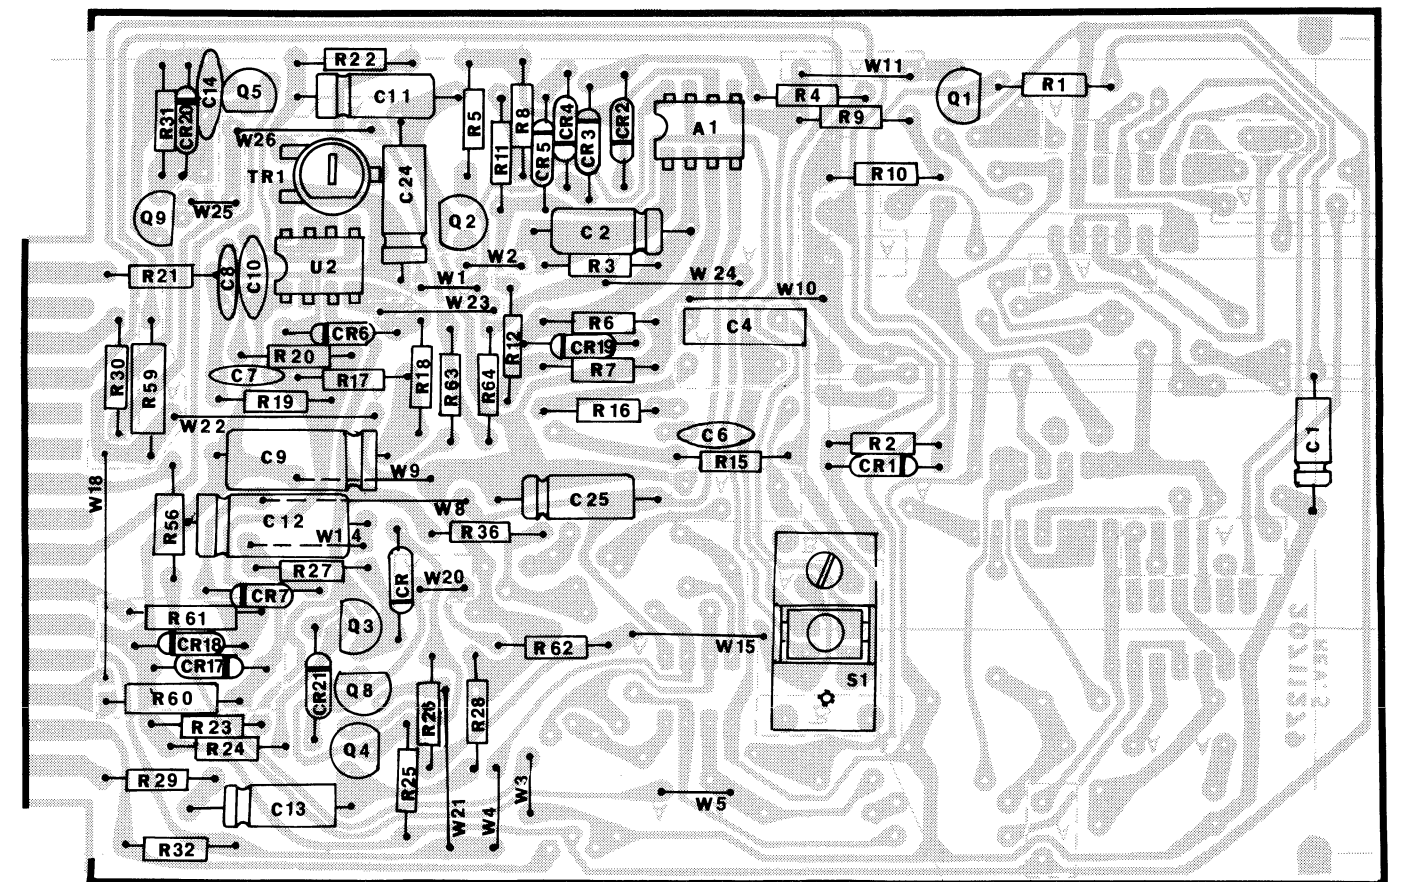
1000Hz Option Board PCB Assembly (825A & 830 Models Only)
